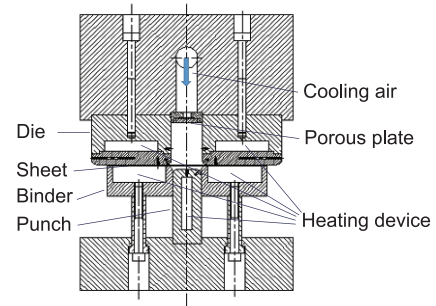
(Color online) Experimental tool design for Q&P hot stamping.
